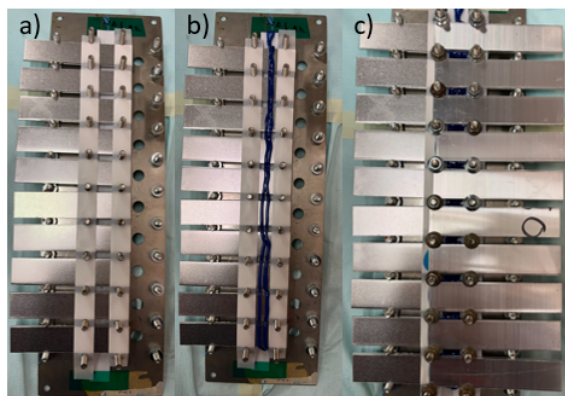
a) Coupons fixated in the fixture plate with the teflon strings b) addition of adhesive on the coupons c) attachment of the secondary coupons as well as screw nuts.
